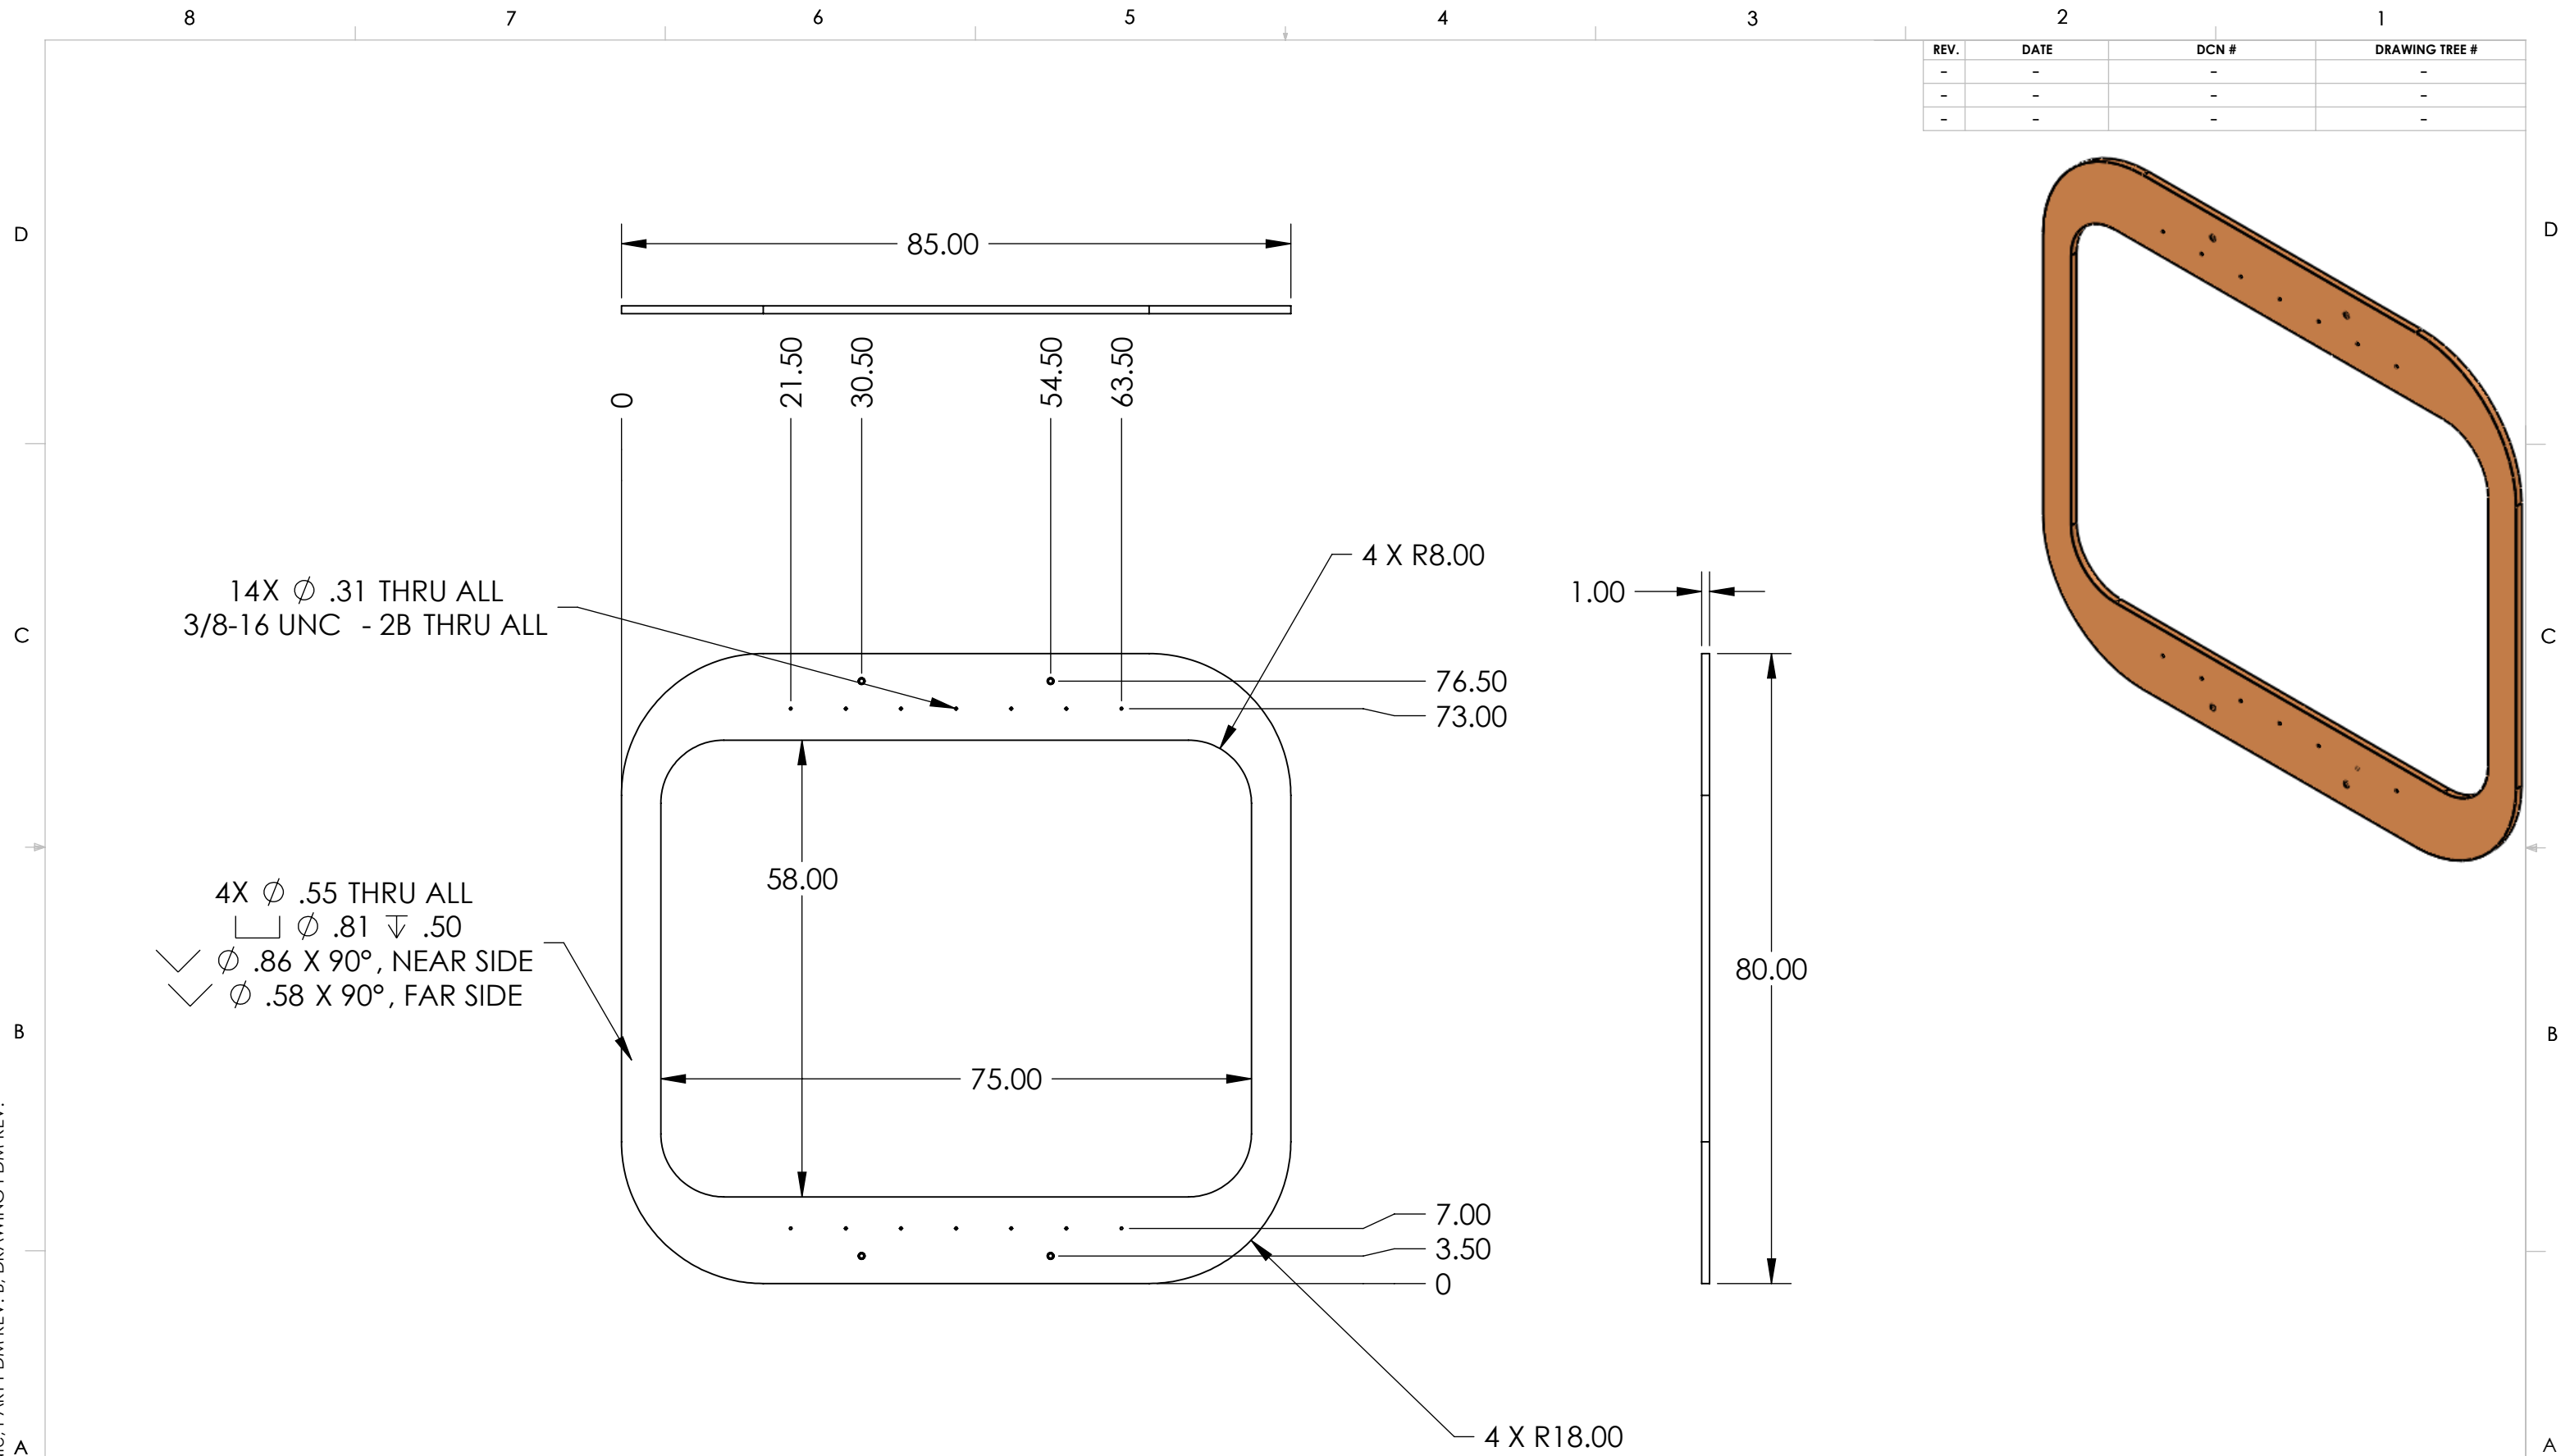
PLATE CAN BE TWO PIECES WELDED INTO ONE. TOP SURFACE MUST BE SMOOTH AND FLAT IN MOUNTING AND SEAL AREA.
